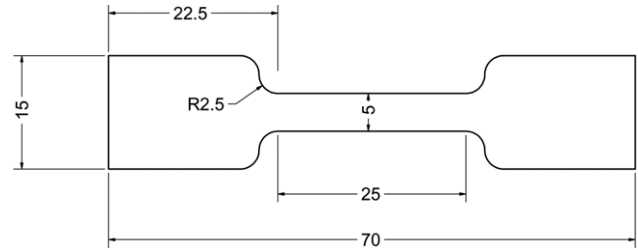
Dimensions of the uniaxial tensile sample in mm.
